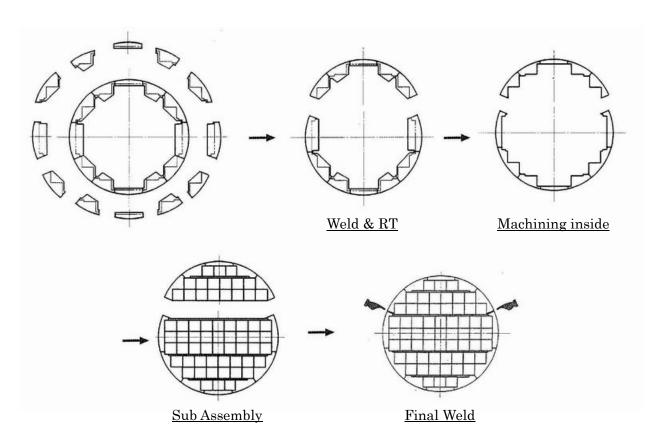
Dry Storage Cask Basket Fabrication Plan
